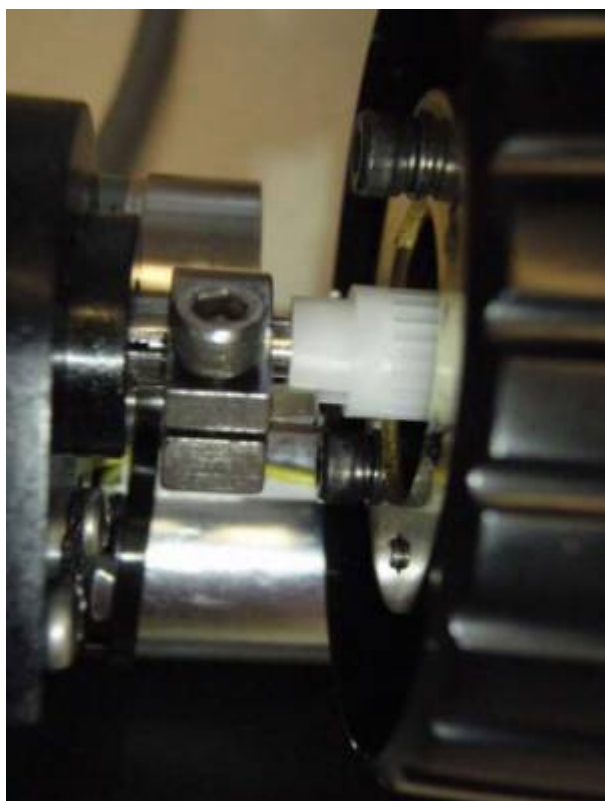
Installing the tab in the slot & tightening the drive shaft clamp
